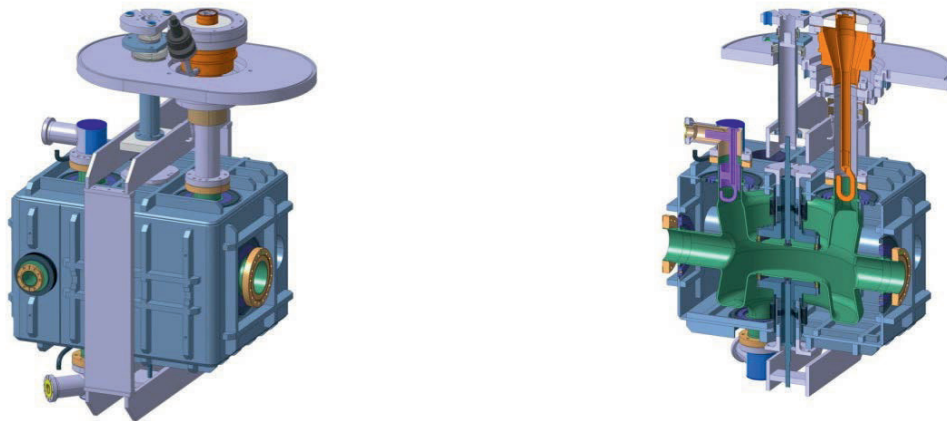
(left) The DQW cavity inside its helium tank with the field probe port (front), beam port (right) and tuner frame around. (right) Sectional view of the DQW cavity inside its helium tank with the power coupler (top right, orange), HOM coupler (left, top and bottom), and tuner (centre, top, and bottom).
